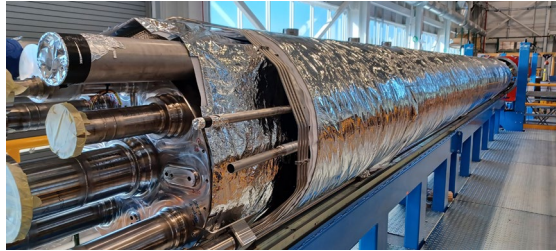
Completed Cold Mass assembly ready for cryostating.
